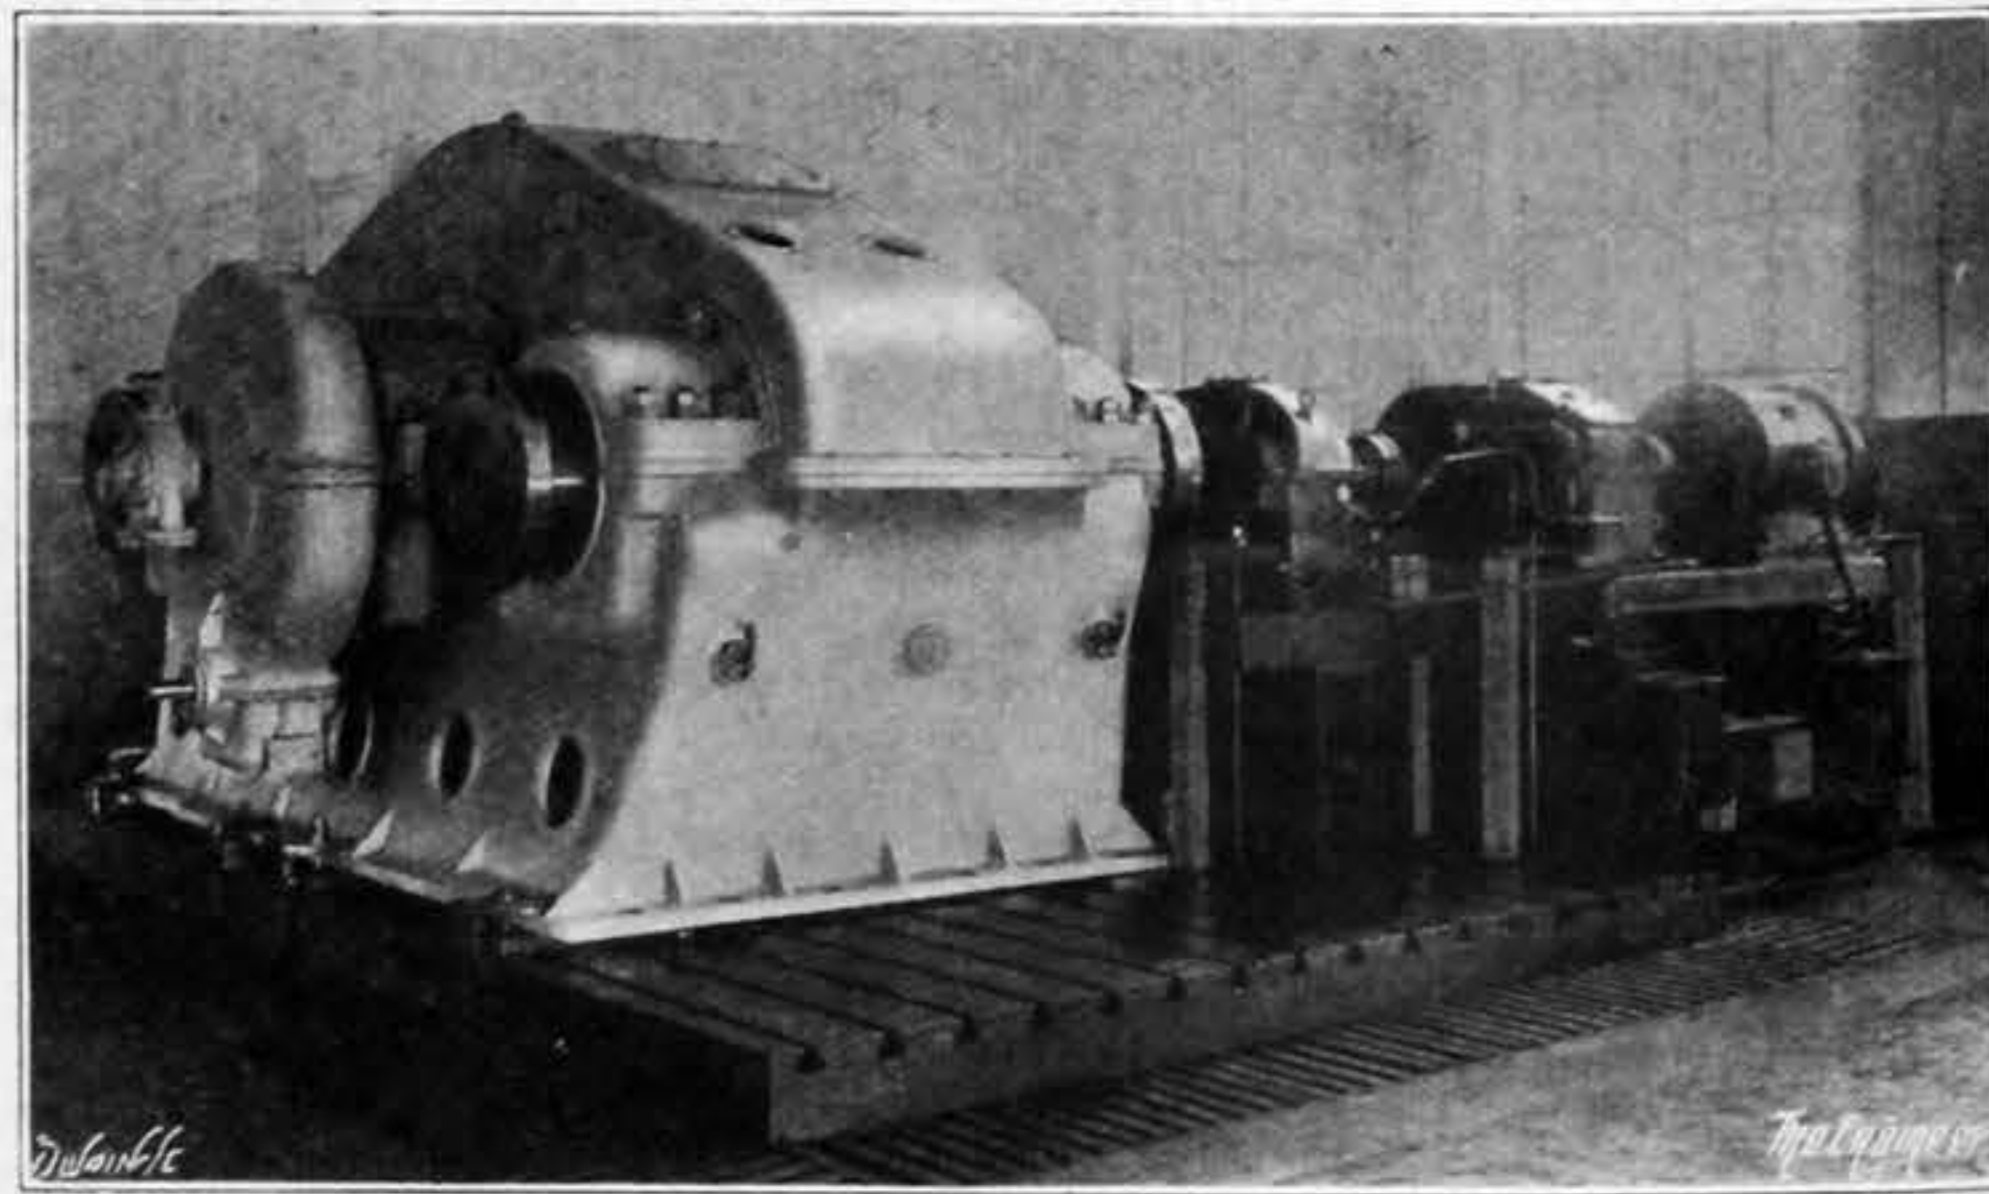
RUNNING IN GEAR DRIVE ON TEST BED
